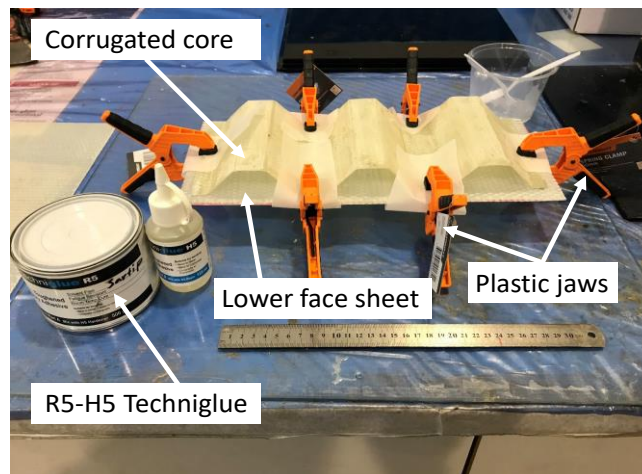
Bounding of fabricated upper and lower face sheet and corrugated core by using R5 and H5 Techniglu
